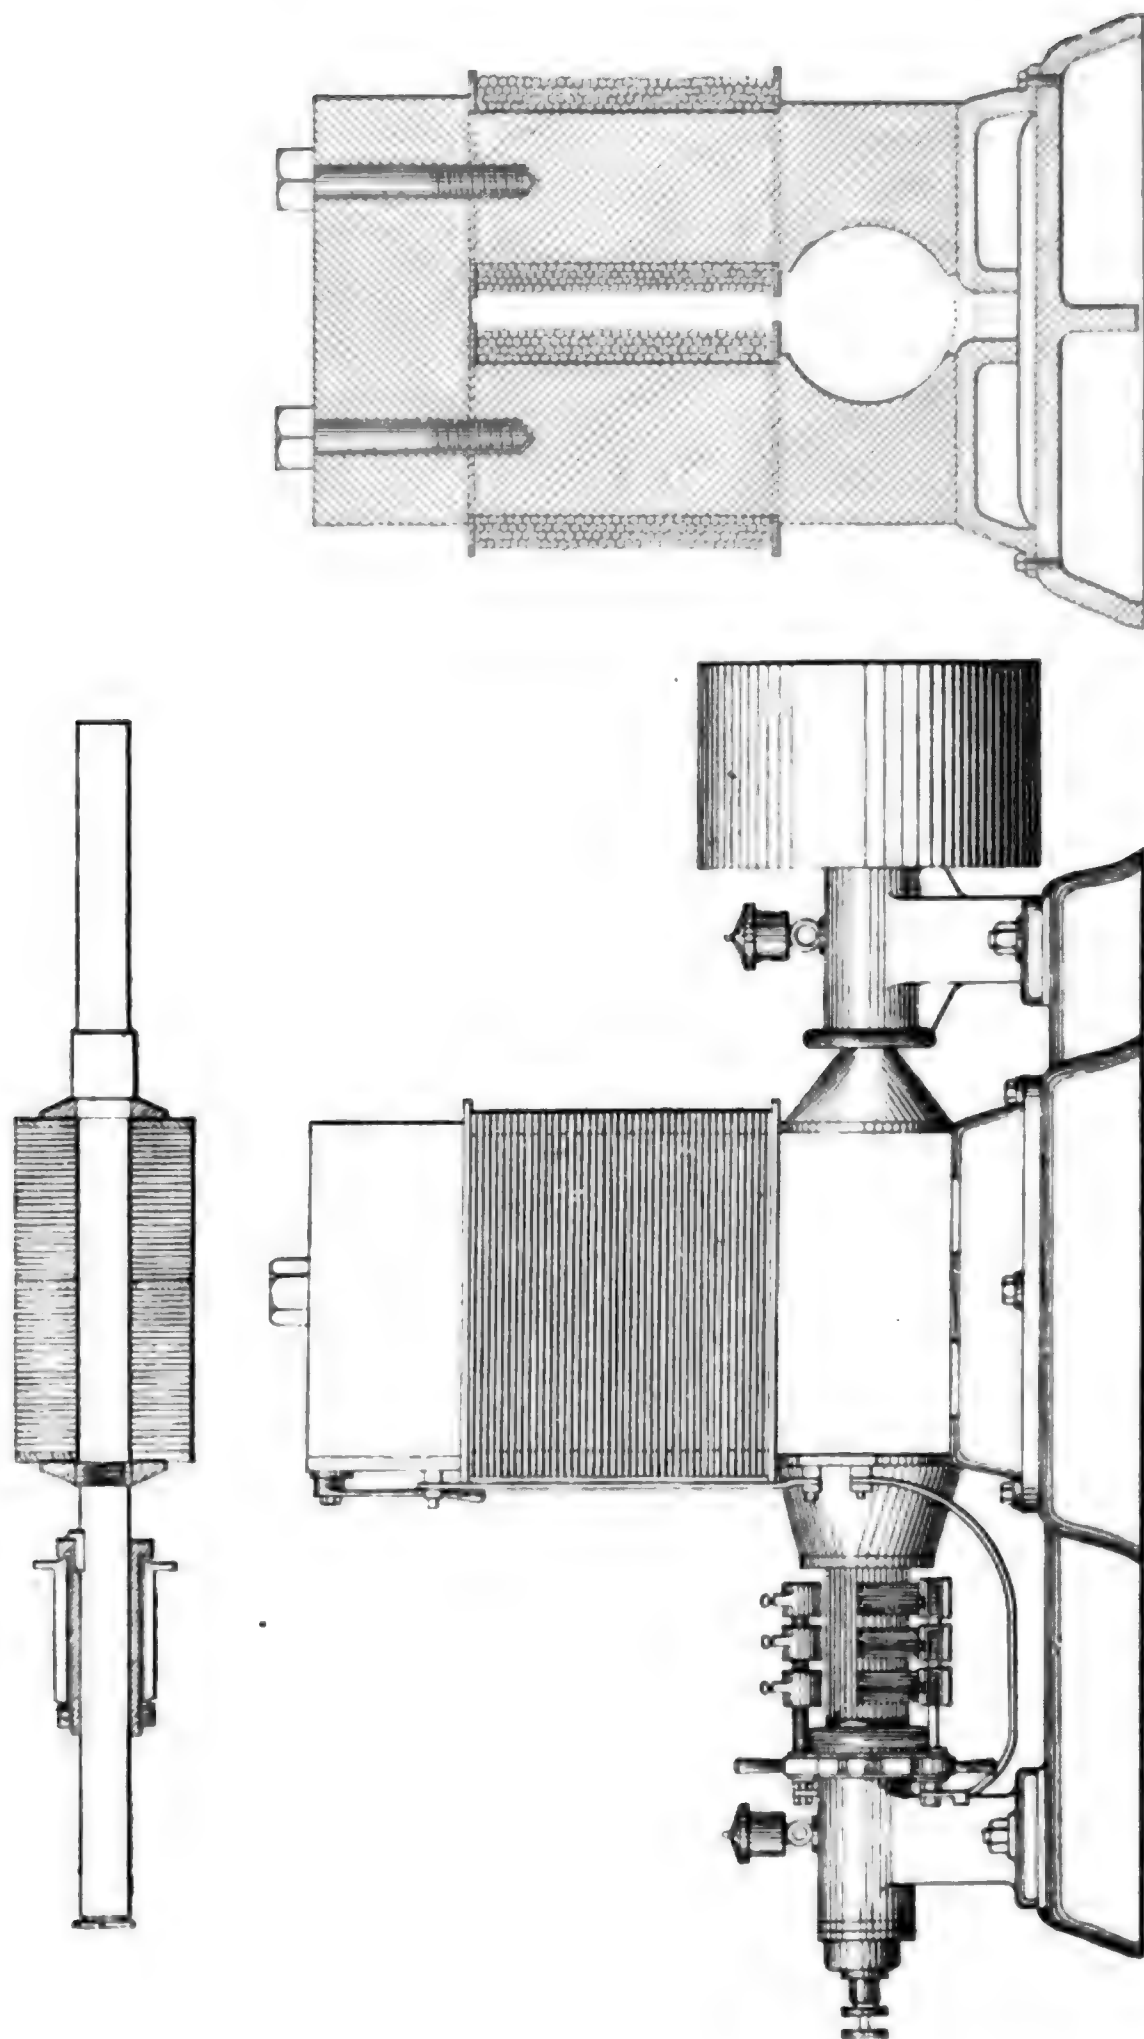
EDISON-HOPKINSON DYNAMO: ELEVATION, SECTION, AND SECTION OF ARMATURE.
